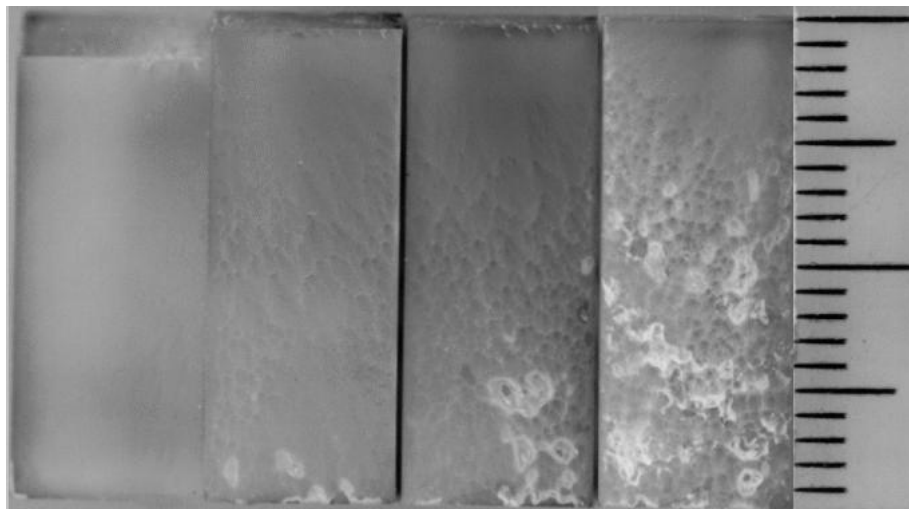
Fracture specimens. In each case the crack has propagated from top to bottom. Notch sizes are 2mm (left specimen), 1mm, 0.5mm, and 0.1mm (right specimen). The scale shown on the right is in mm.
